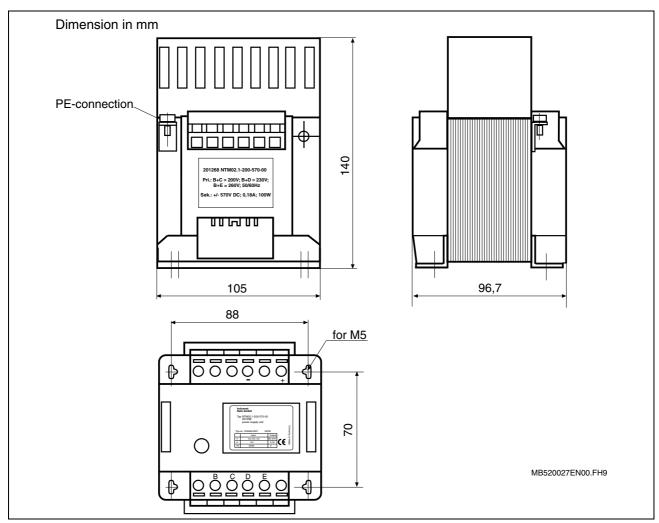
Dimension Drawing NTM02.1 power pack module
